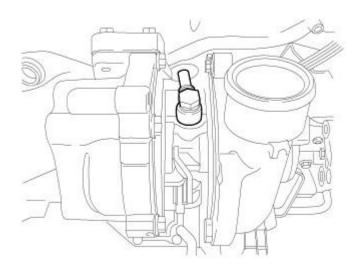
Exhaust Manifold Heat Shield Courtesy of CHRYSLER LLC
